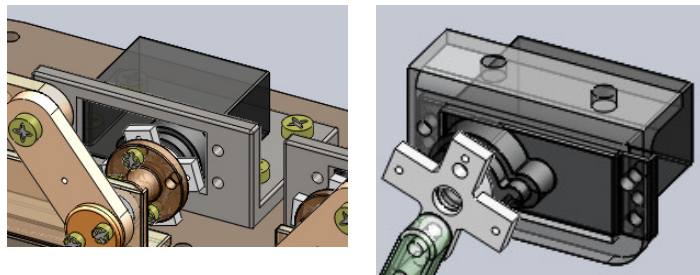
Mounting Brackets of HS 65-HB in Dorothy
